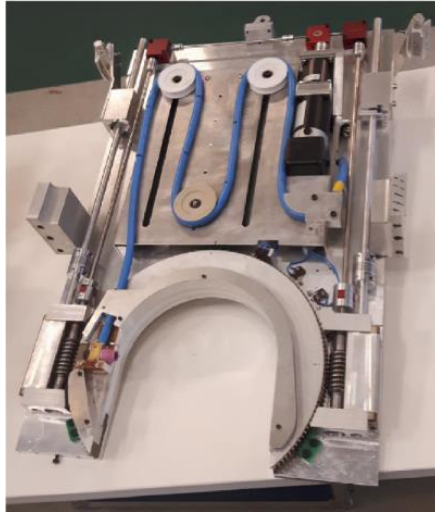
Welding tool developed for ITER Neutral Beam System [96]
